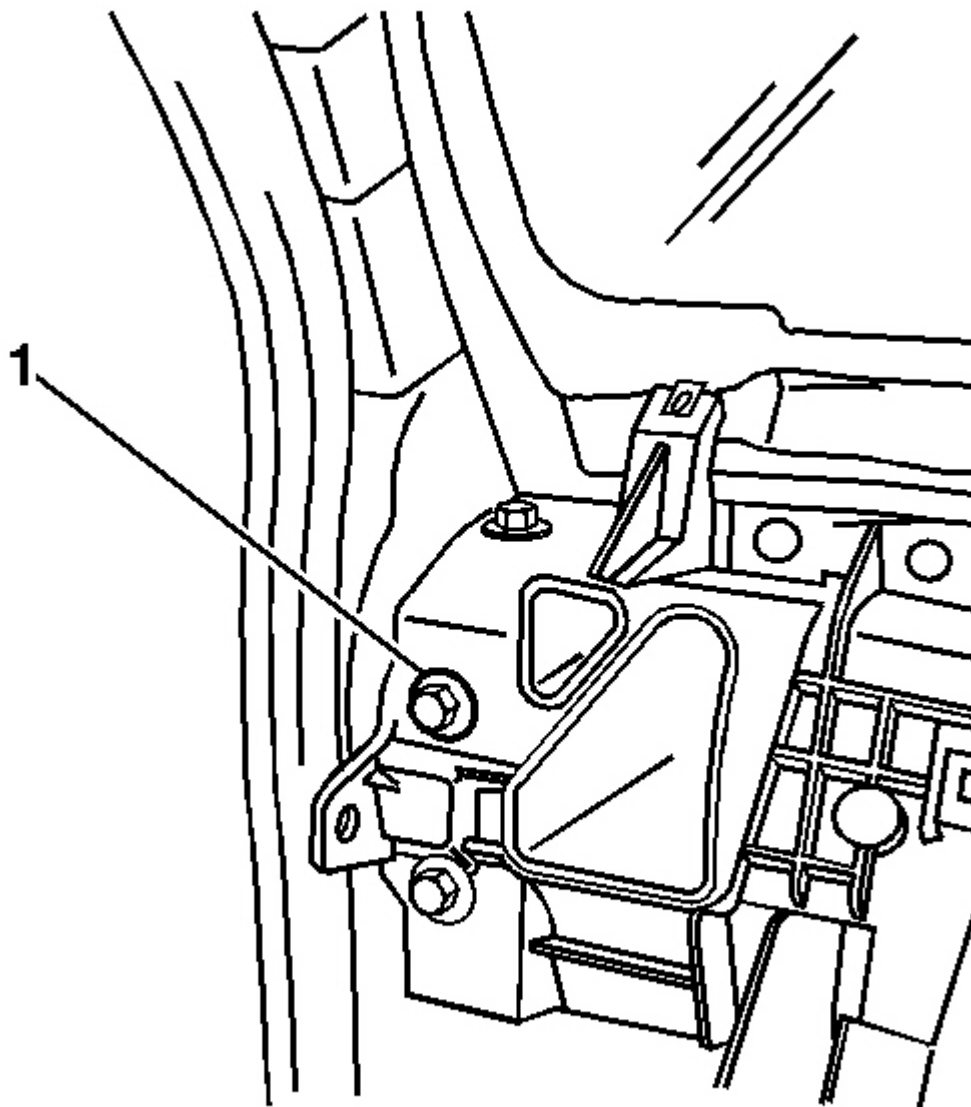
Identifying SIR Harness At IP Carrier
